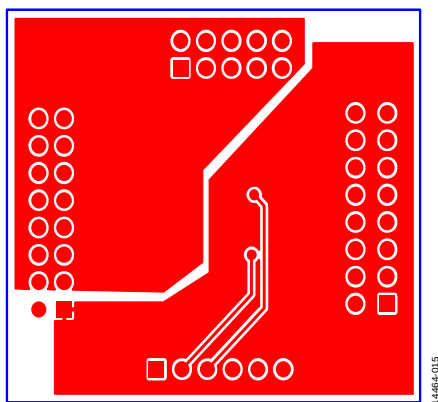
EVAL-AD5328DBZ Daughter Board Bottom Side Routing
